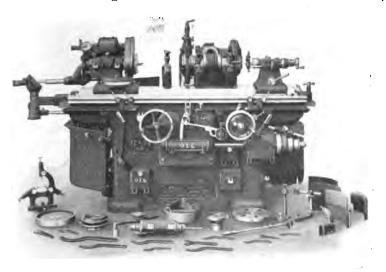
Universal (multipurpose) grinding machine. (Courtesy Norton Co.)
